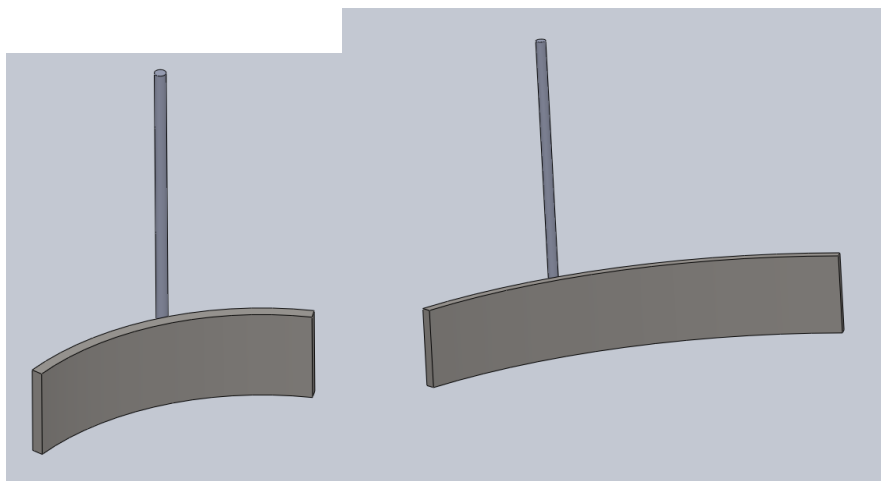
Initial Prototype Rotary Arm Assembly (left) and Final Assembly (right).
